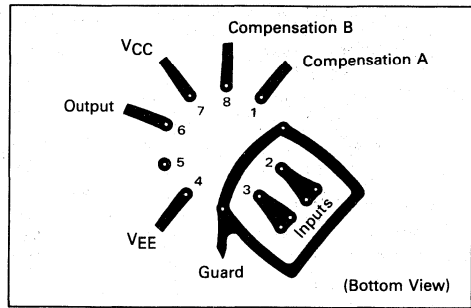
SUGGESTED PRINTED CIRCUIT BOARD LAYOUT for INPUT GUARDING USING METAL PACKAGED DEVICE
